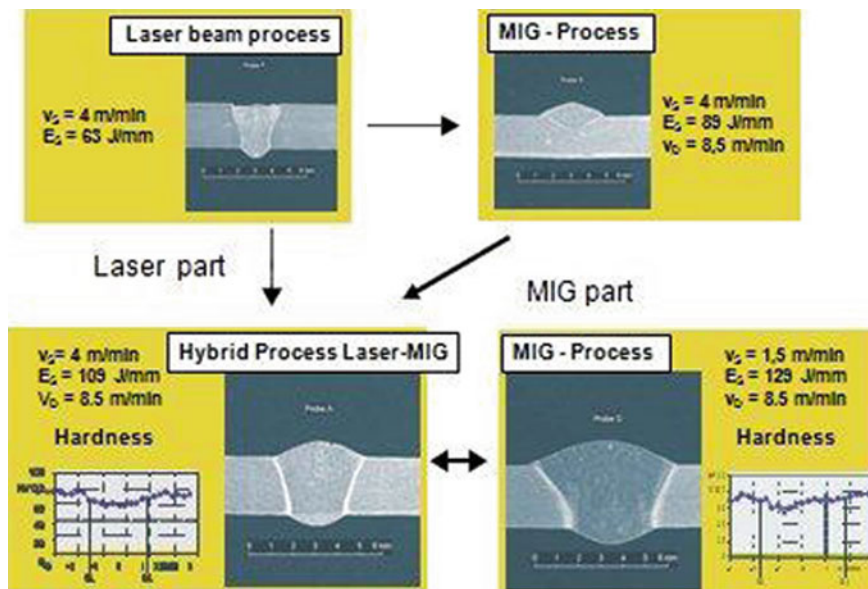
Laser MIG hybrid welding of aluminum alloys, contribution of laser and MIG process
